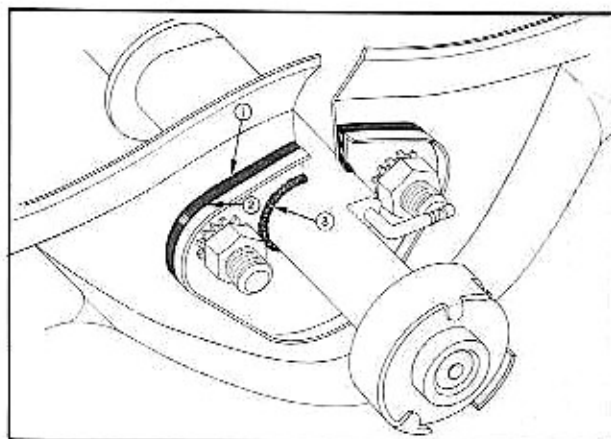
Sealing Windshield Wiper Transmission Shaft
